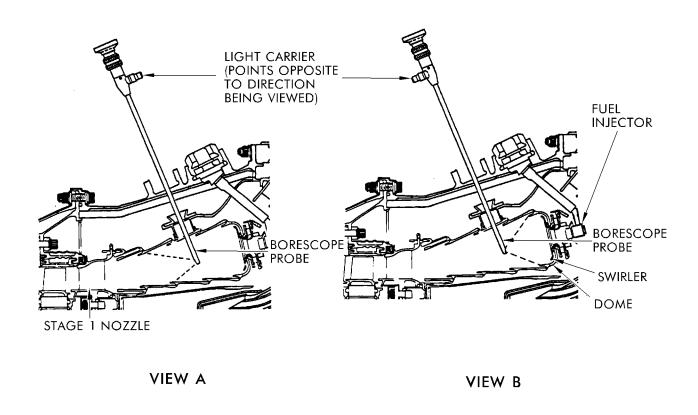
Combustion Section (Port No. 4 or Port No. 7); Borescope Inspection
